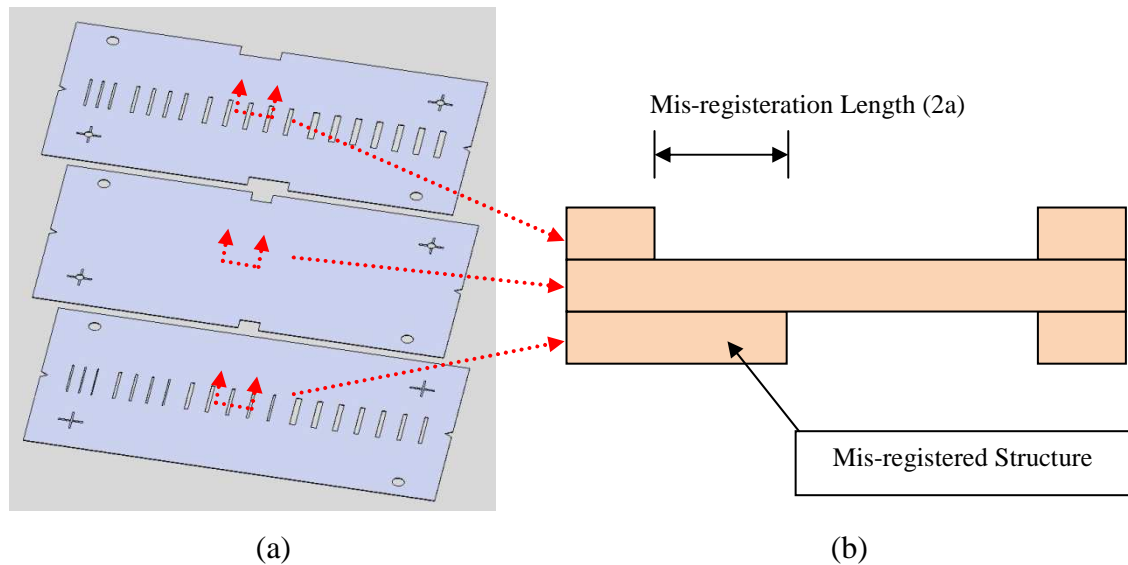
Top view (a) and cross-sectional side view (b) of the test coupon design.
